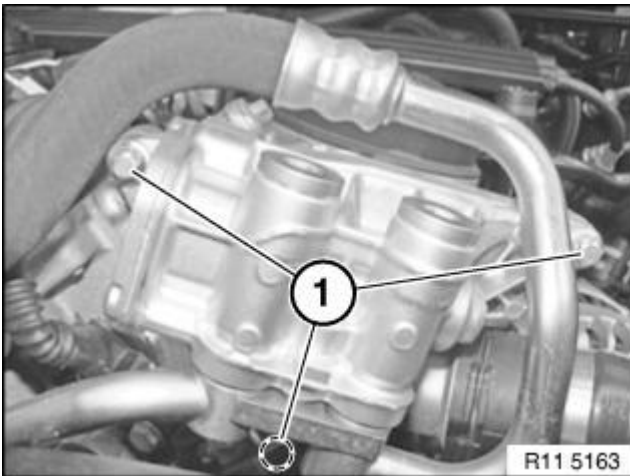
Identifying Bolts On Oil-Coolant Heat Exchanger
